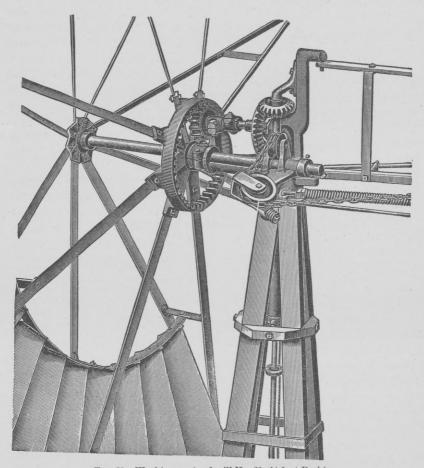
Working parts of mill No. 26—14-foot Perkins.
